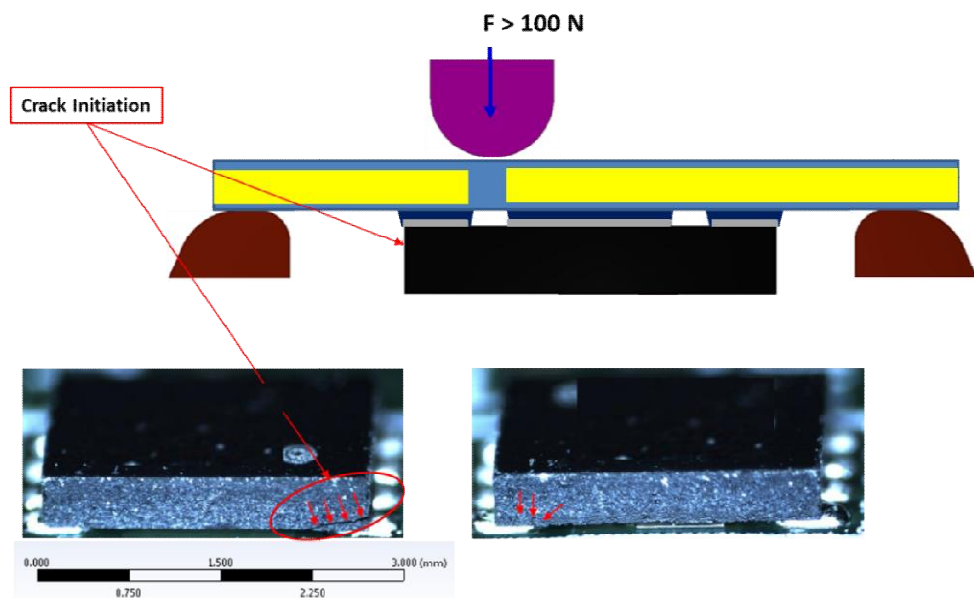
Crack signatures for the tested package soldered on PCB in Fig. 6c
